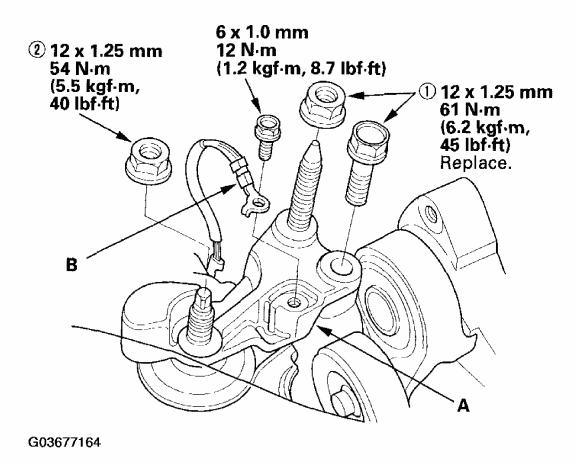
Installing And Tightening Upper Engine Mount Bracket Bolt With Specified Torques
